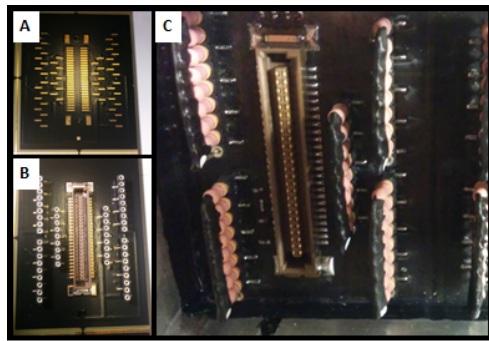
A. Soldering pads for a set of 48 anodic pads; B. Connectors soldered; C. After mounting of the resistive arrays.
